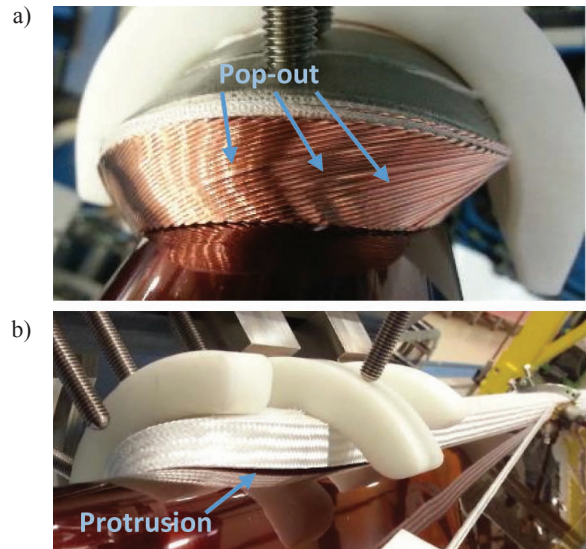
Prototype coil winding with Nb_3Sn ; a) Strand pop-out on pole-end; b) Right: Protrusion from a mandrel surface
